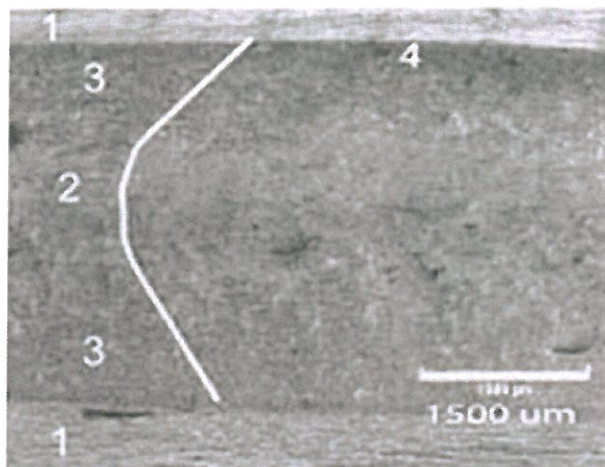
Crack-front trace as observed by markings on the fracture surface of a CTOA specimen. The regions of the specimen are (1) the outside surface, (2) the 'flat' portion of the fracture, (3) the 'knife-edged' portion of the surface, and (4) the final fracture region.
